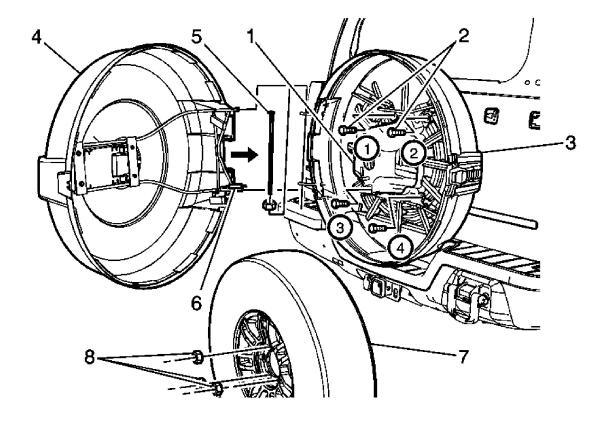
Identifying Spare Wheel Stowage Outer Cover Courtesy of GENERAL MOTORS CORP.
